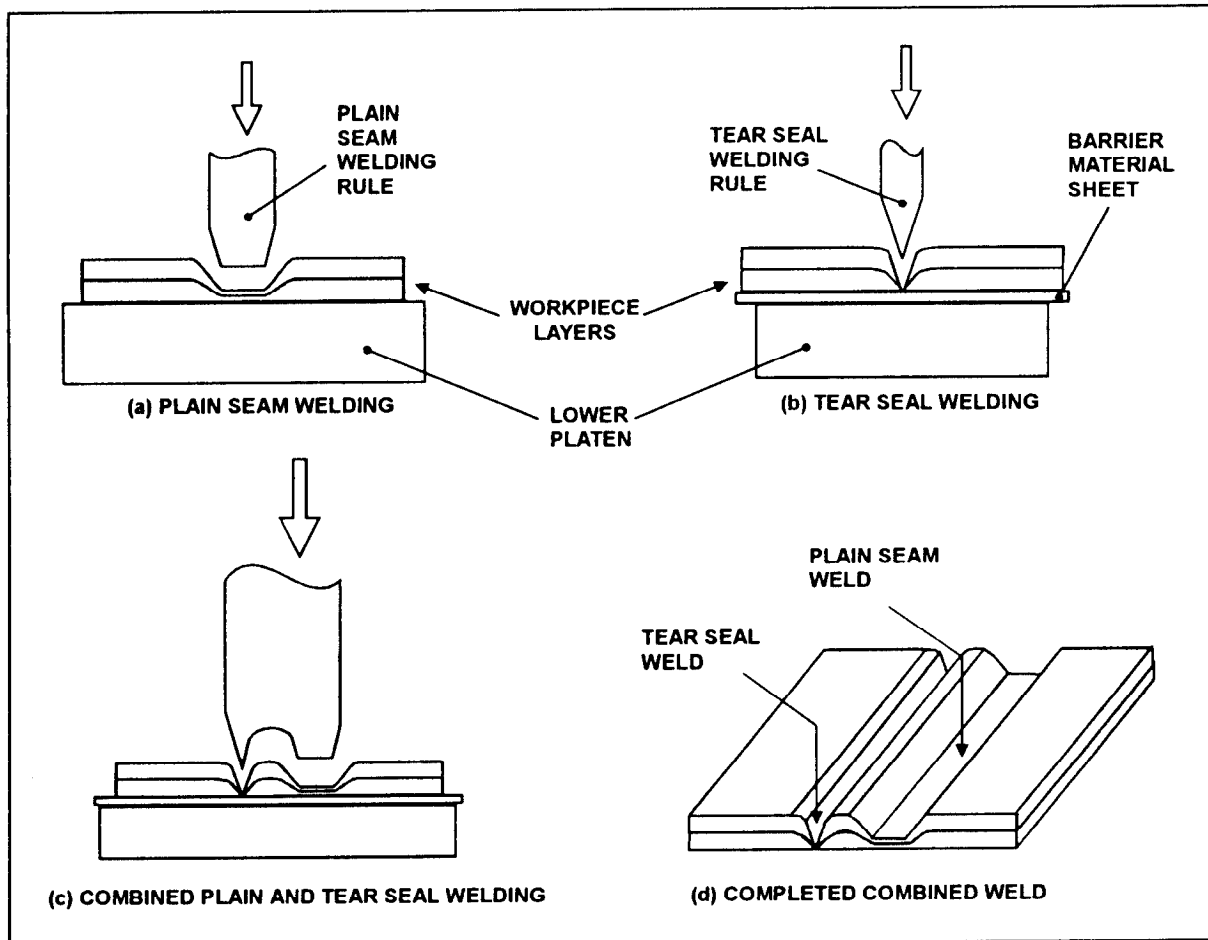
Plain and Tear-Seal Welding Rule
